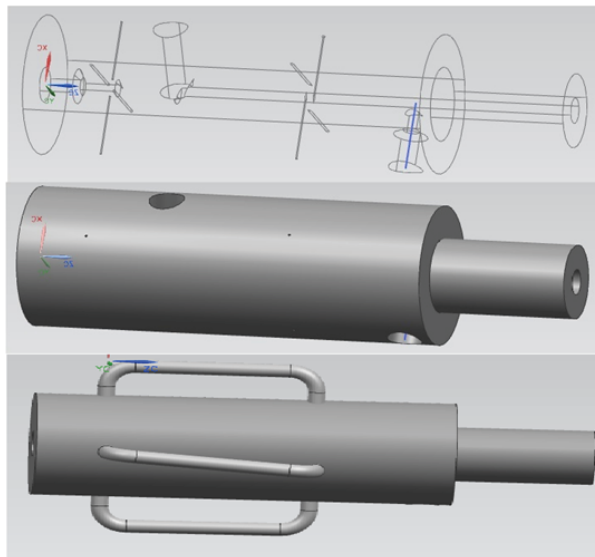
CAD Model of Latest Igniter With Incorporated Changes
